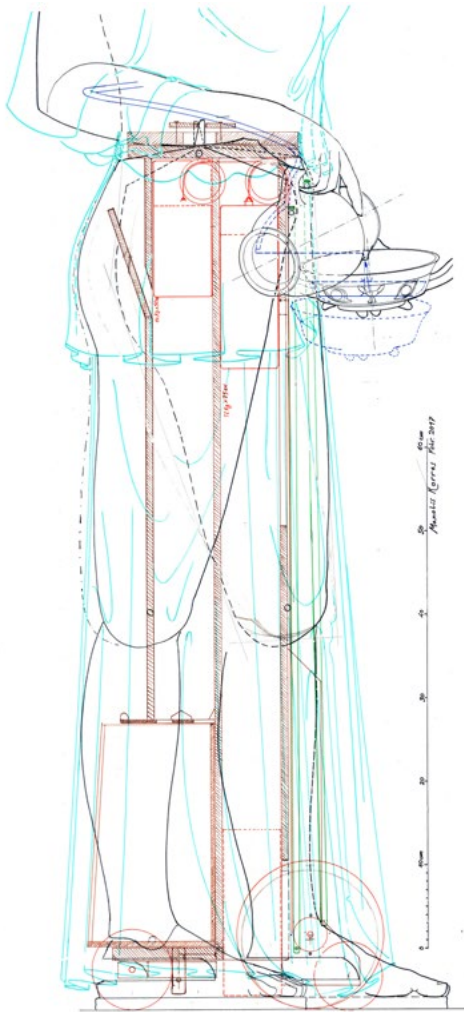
Side-view with axial section, showing supporting shaft and locomotion mechanisms. Hand drawing (February 2017, partially revised).
